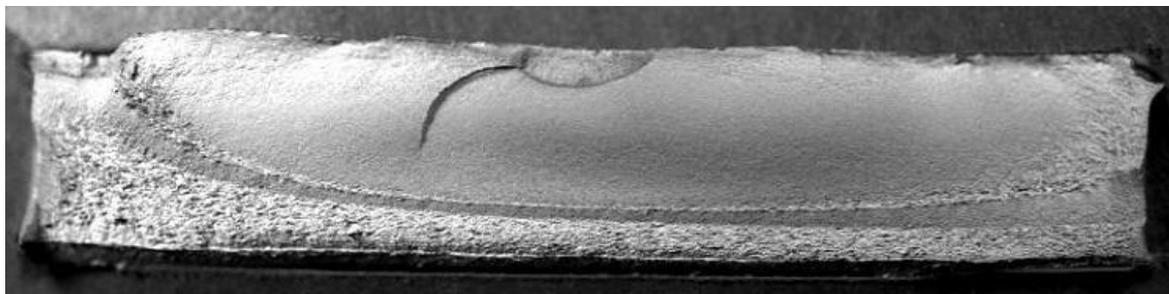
Fatigue fracture surfaces of the 3PB specimens. As welded, followed by hammer peening of a crack of 2.23mm. Fatigue marking at 25% strain reduction. $\Delta\sigma=325\text{MPa}$. $N_i=252406$. $N_T=1398259$ cycles.
